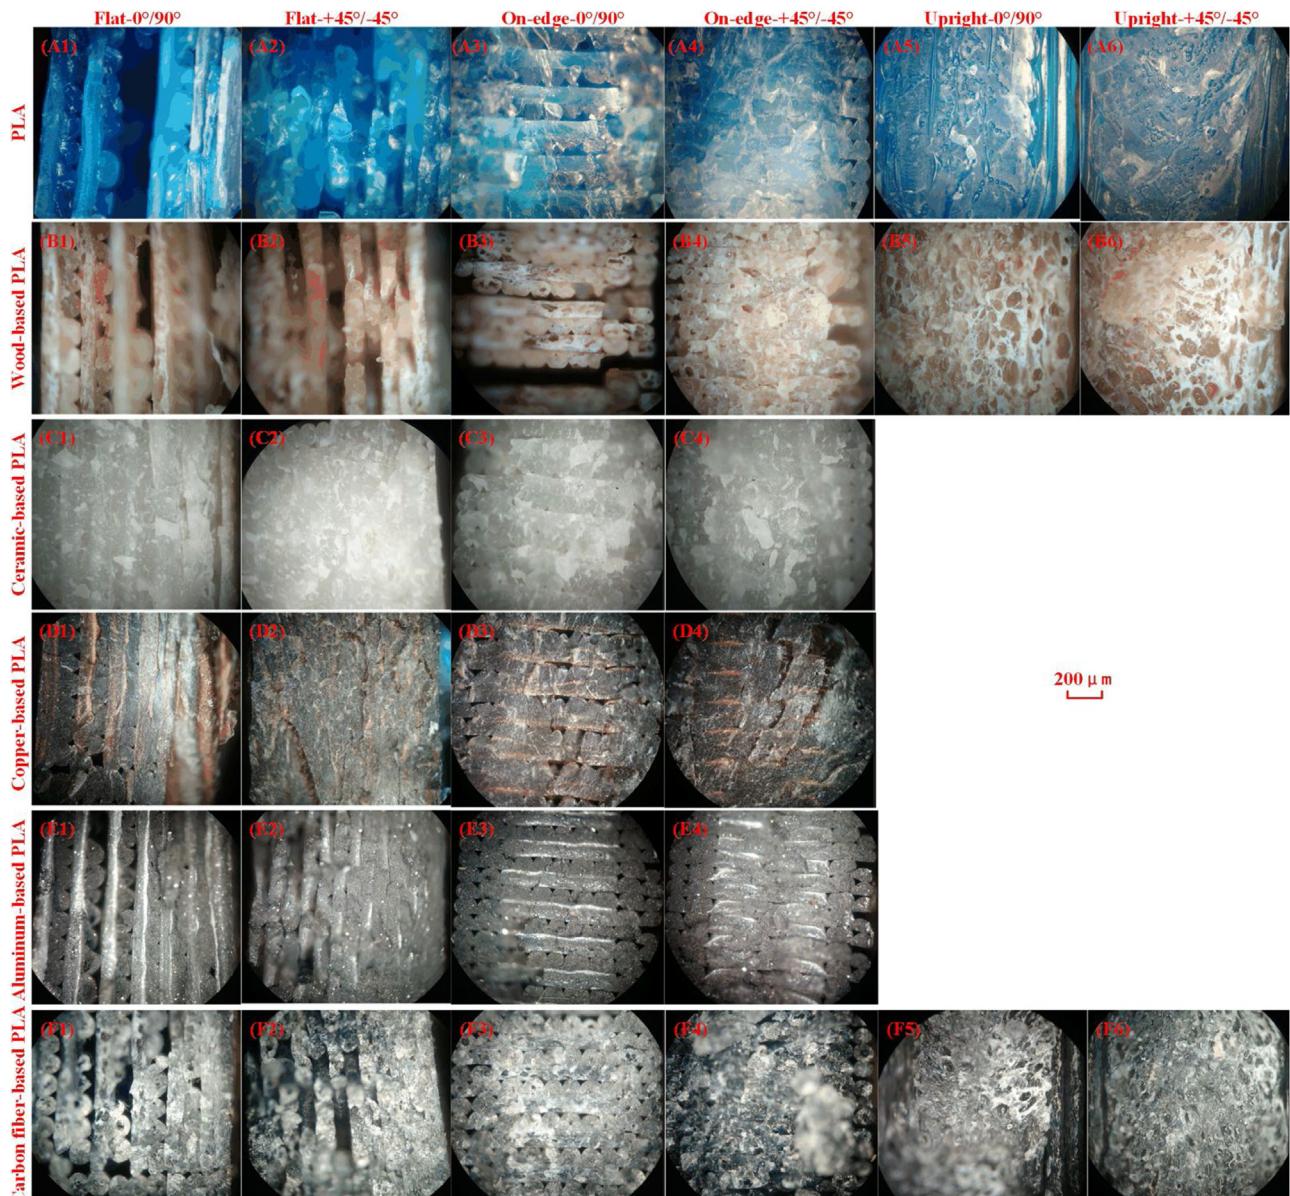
Optical images of fracture morphology for all printed samples after tensile tests.
